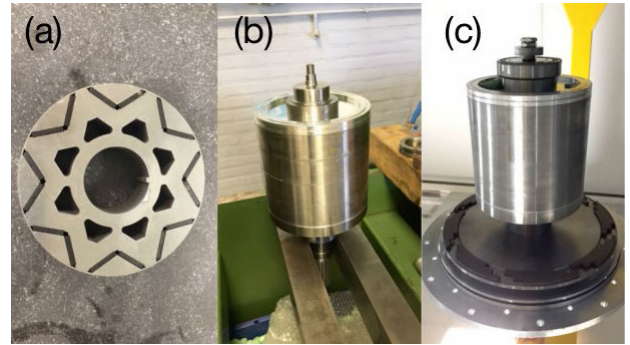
Prototype rotor parts. (a) Radial-flux rotor for both #M1 and EHFM. (b) #M1 rotor. (c) EHFM rotor.
